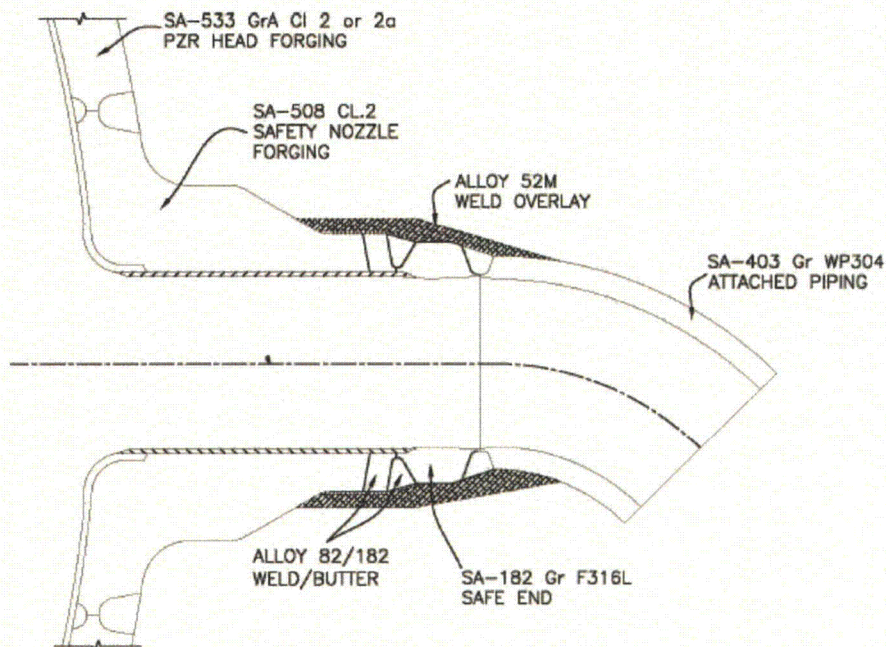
Illustration of Typical Weld Overlay Design for McGuire Unit 1 Pressurizer Nozzles
